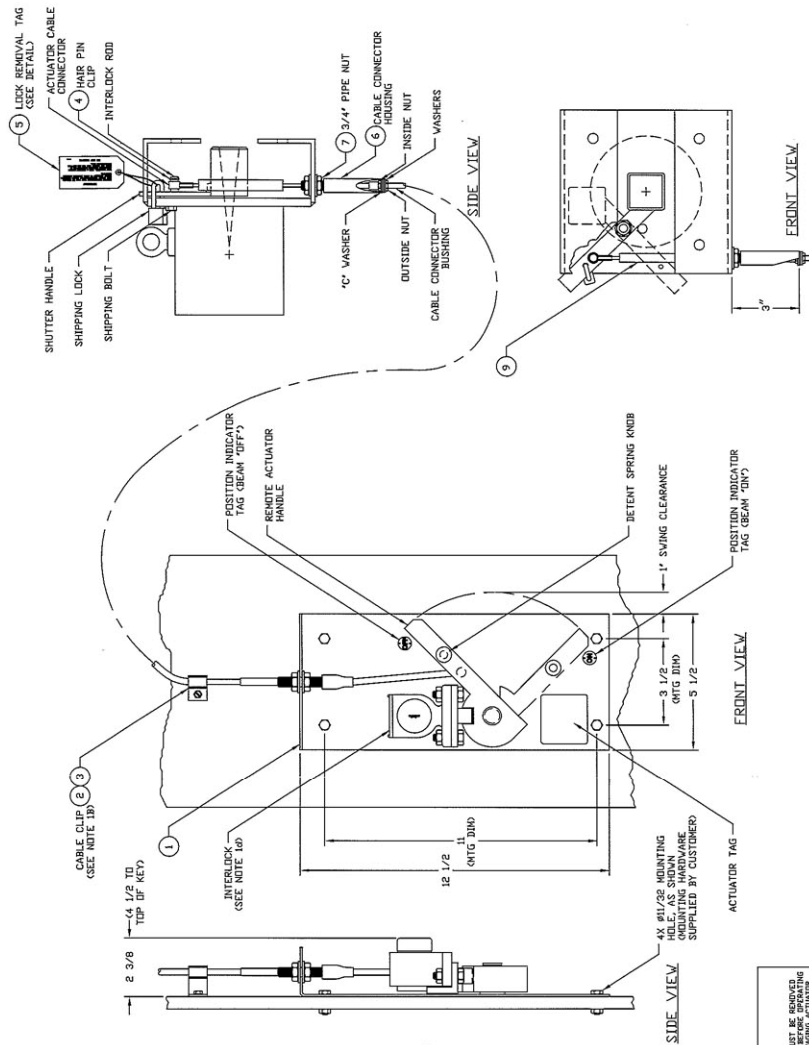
865484: Mounting dimensions, 5204 source housing, 8000 mCi or less (sheet 1 of 1)
